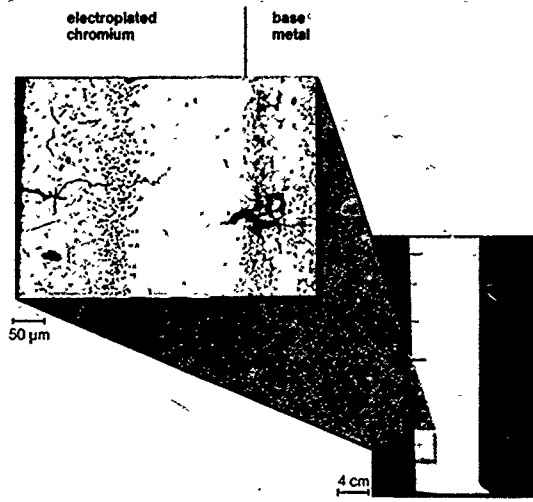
Blade failure due to fatigue cracks originating from a cracked coating.
